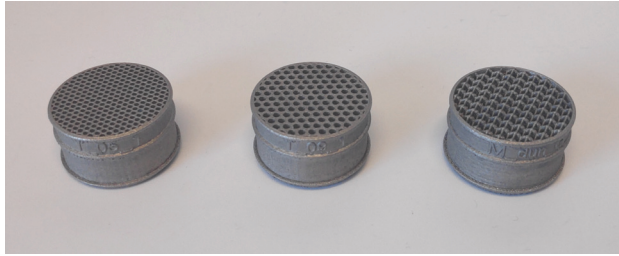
Metal heat-and-moisture exchanger (HME) prototypes (without a speaking valve) 3D-printed from stainless steel (SS 316 L). Prototypes' exterior dimensions: height 13 mm, diameter 21 mm. From left to right: core design Tubes-1 (wall thickness between flow channels  $0.2 \pm 0.1$  mm, flow channel diameter  $1.0 \pm 0.1$  mm), Tubes-2 (wall thickness between flow channels  $0.4 \pm 0.1$  mm, flow channel diameter  $1.4 \pm 0.1$  mm), and Mesh (mesh wire diameter is  $0.45 \pm 0.1$  mm, distance between mesh wires is  $1.22 \pm 0.1$  mm).
